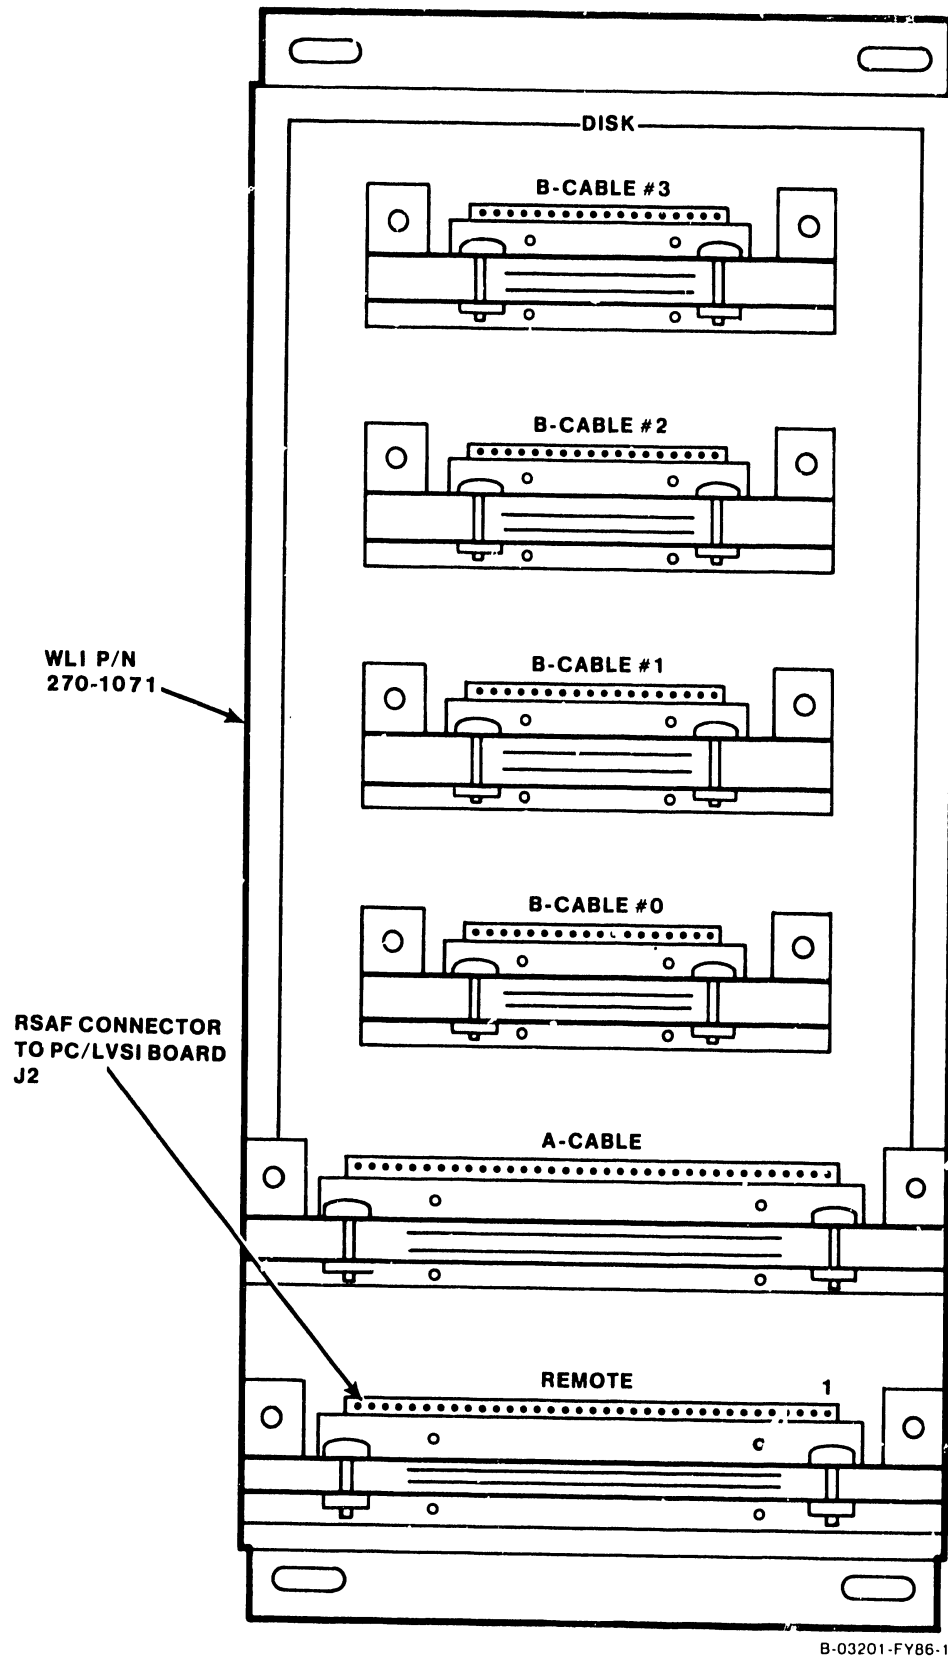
VS-85/85-H/90/100 RSAF Back Panel Assembly
